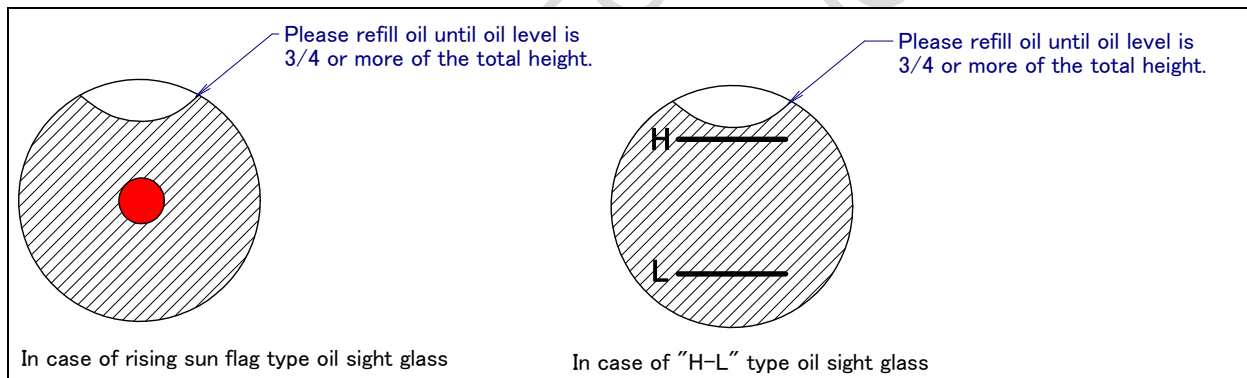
(d) Standard of oil sight glass (supplying oil J5/J6-axis gearbox)
